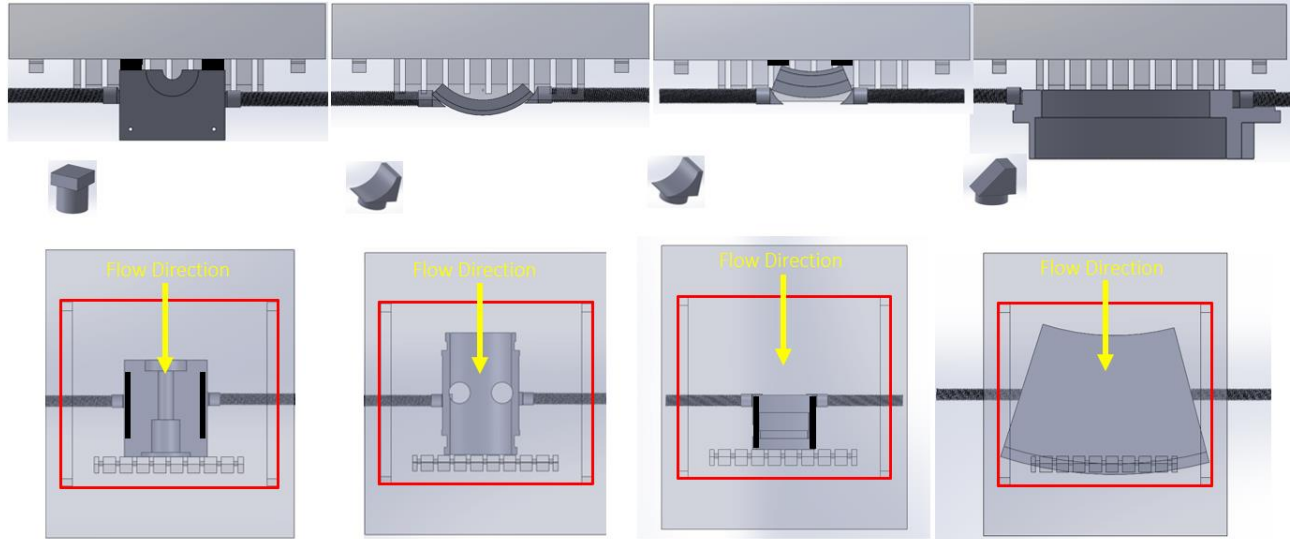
CAD assembly with example parts and example hands for attachment onto the ends of the supporting clamps (rod size 0.5 in, thread size UNC 1/2"-13) based on the associated part type.
